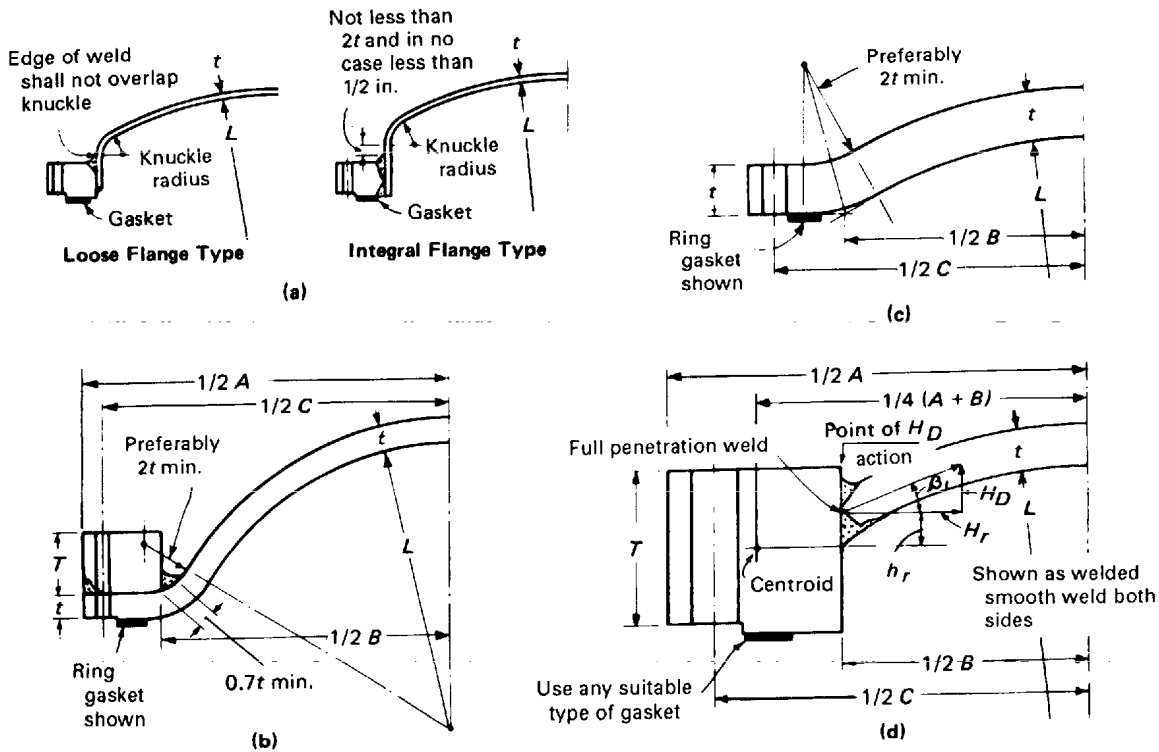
SPHERICALLY DISHED STEEL PLATE COVERS WITH BOLTING FLANGES
